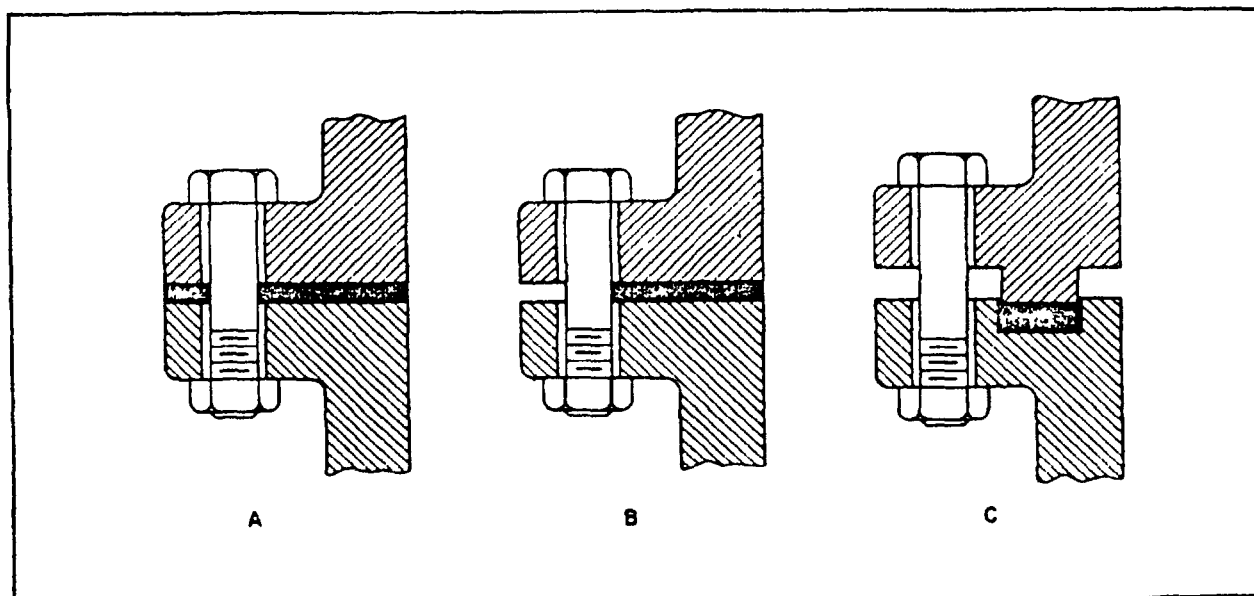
Use of Flat Gaskets in Basic Flange Joints
